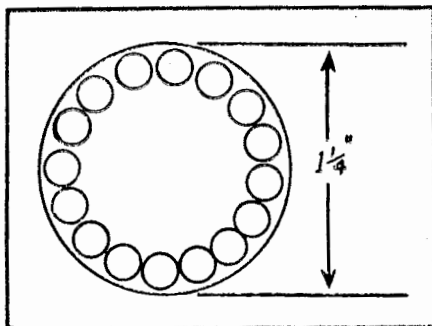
Here's how to cut a valve hole in a steel chassis. Drill a series of small holes just inside the proposed circumference and then break through the partitions, allowing the centre piece to fall out. Clean up the edges with a round file.
